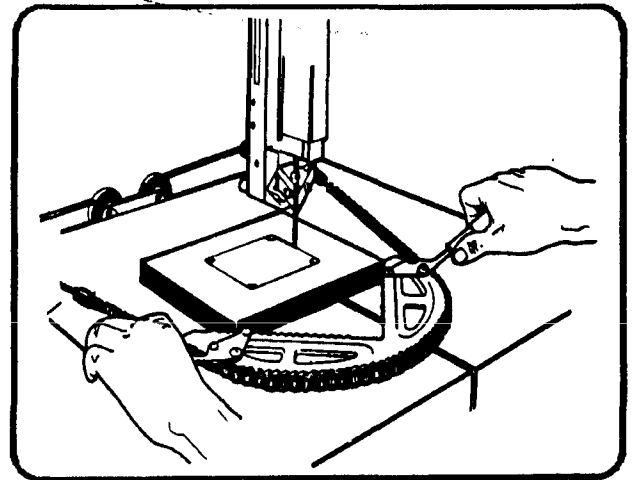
Work holding jaw device used for straight-line sawing with power feed.
